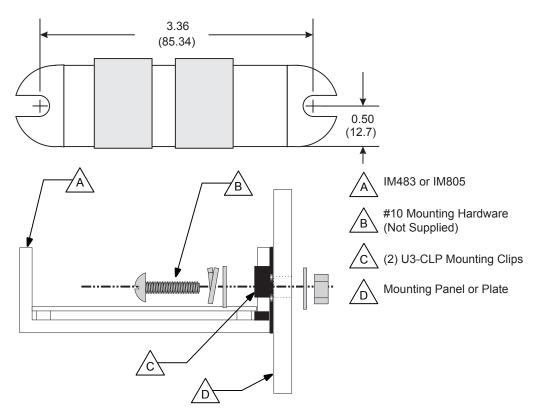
U3-CLP Side Mounting Clip Dimensions and Mounting
